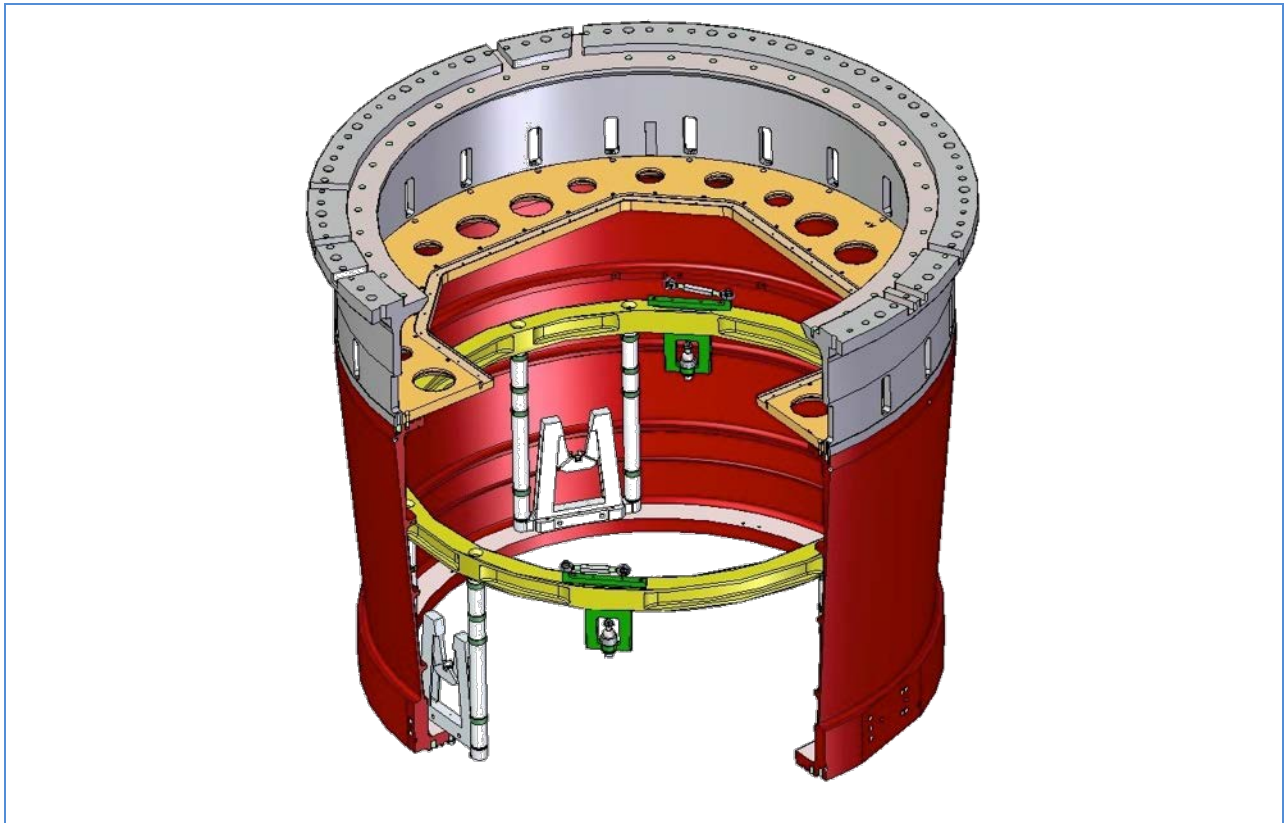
Quarter section view of cryostat body internal support structure and rear support ring
